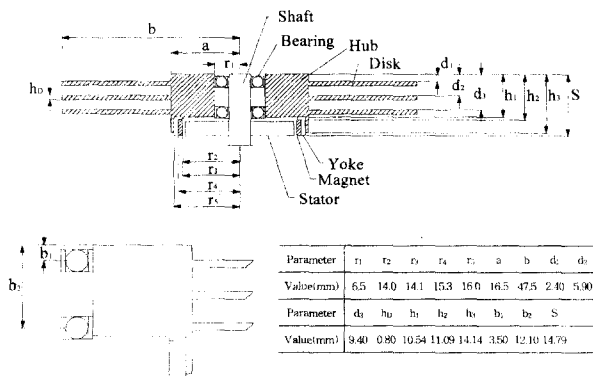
Cross-sectional view of the 3-disk HDD spindle system
